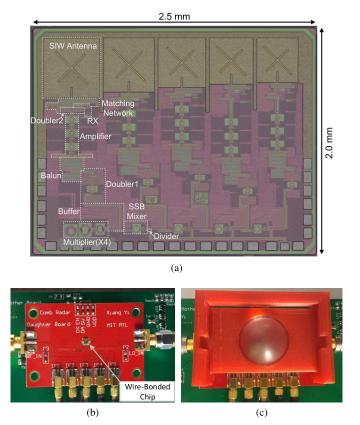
Photographs of (a) 220-to-320-GHz CMOS radar, (b) wire-bonded chip on a PCB, and (c) chip package with a front-side TPX lens.
